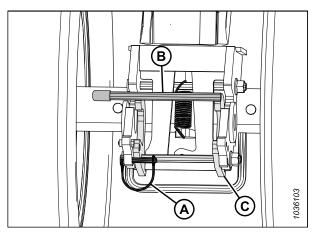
Left Transport Wheels – Rotation Lock Latch Disengaged
